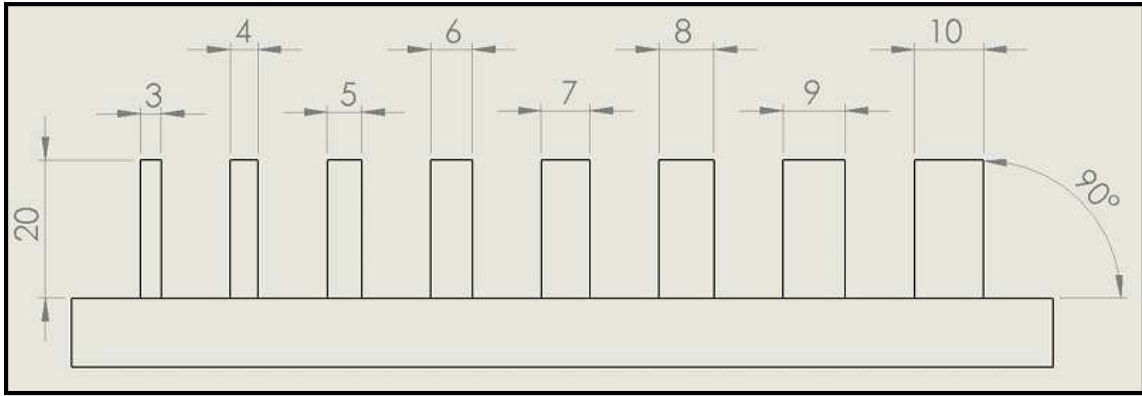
Test geometry 3: 2-D CAD drawing – with dimensions
